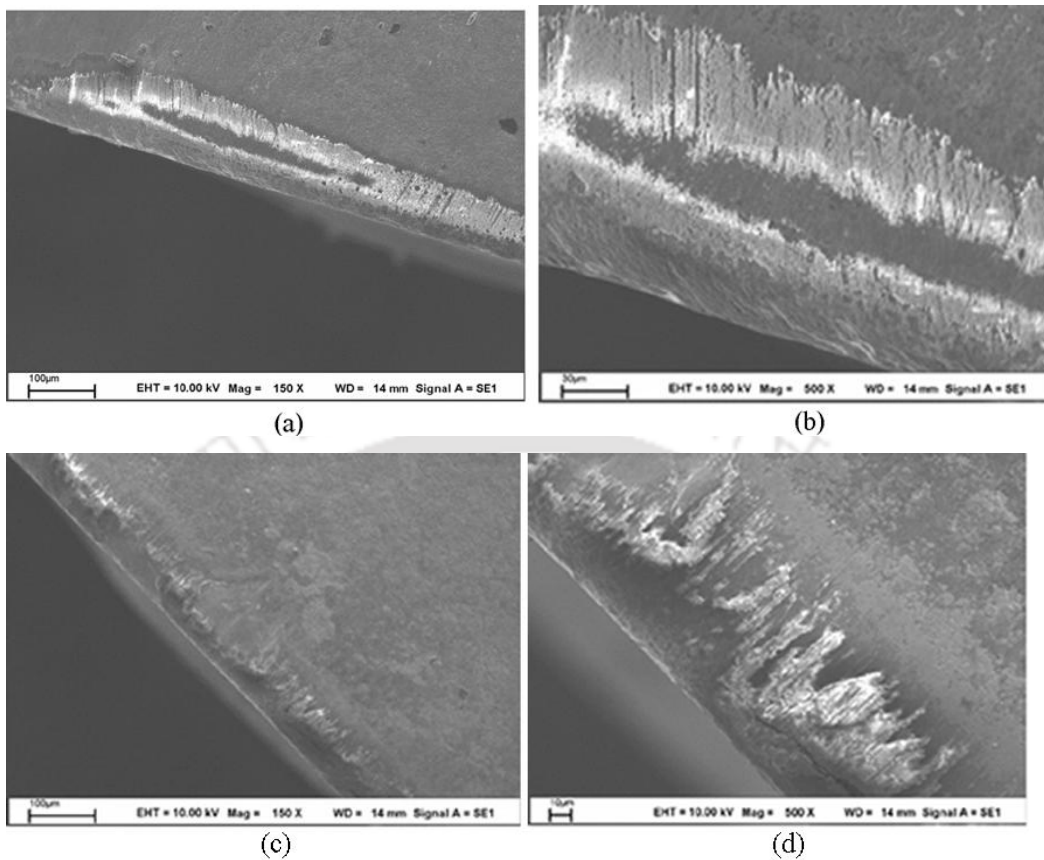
Flank wear (a) Of front cutting tool at 150X magnification (0.24 mm/rev feed and 1 mm depth of cut) (b) Of front cutting tool at 500X magnification (0.24 mm/rev feed and 1 mm depth of cut) (c) Of rear cutting tool at 150X magnification (0.24 mm/rev feed and 1 mm depth of cut) and (d) Of rear cutting tool at 500X magnification (0.24 mm/rev feed and 1 mm depth of cut)
